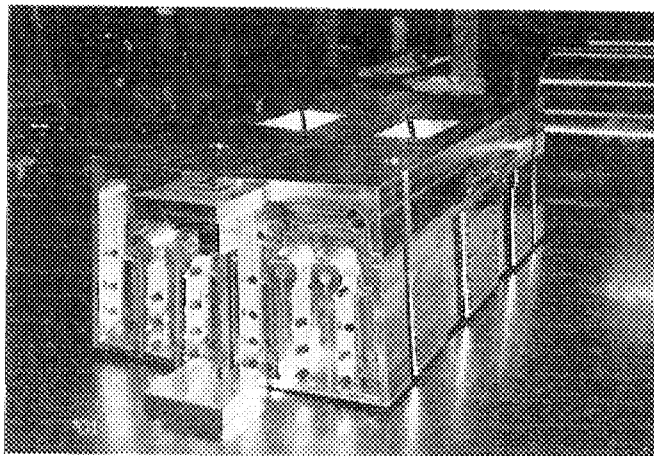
Preparation for EB welding of two 1/4 shield blocks
